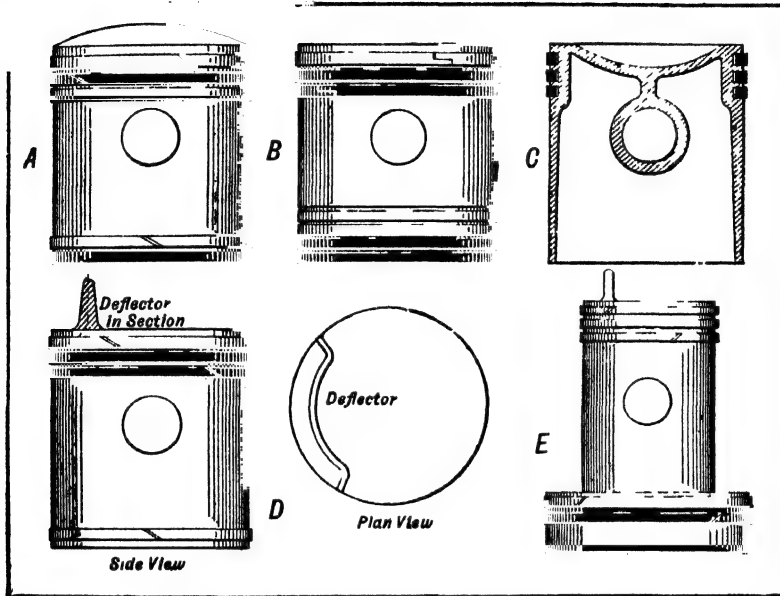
Forms of Pistons Generally Employed in Gasoline Engines. A—Dome Head Piston and Three Packing Rings. B—Flat Top Form Almost Universally Used. C—Concave Piston Utilized in Knight Motors and Some Having Overhead Valves. D—Two Cycle Engine Piston with Deflector Plate Cast Integrally. E—Differential or Two Diameter Step Pistons Used in Some Engines Operated on Two-Cycle Principle.
